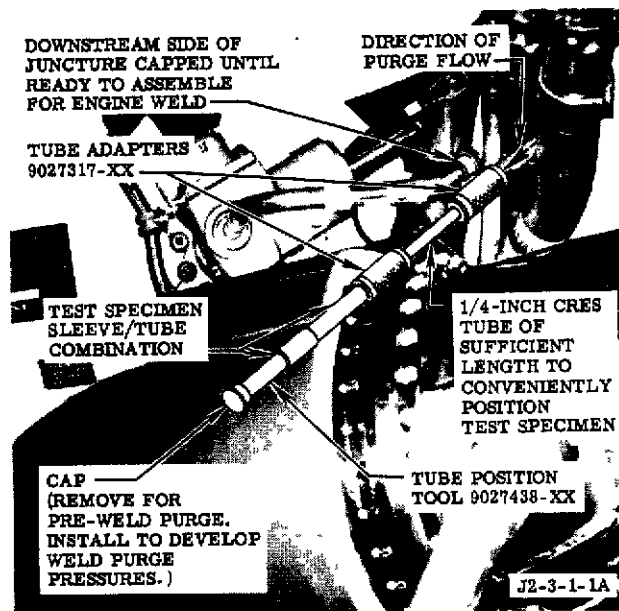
Purge Setup for Welding Test Specimens (Typical)
